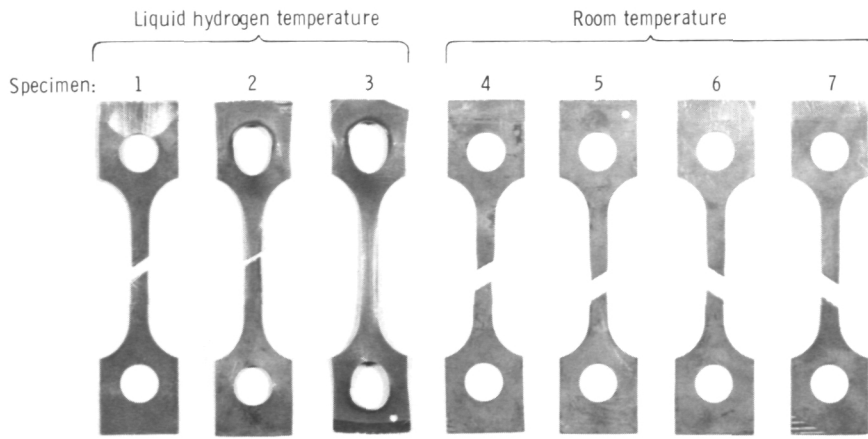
Electroformed nickel tensile specimens after testing (ref. 6 material).
